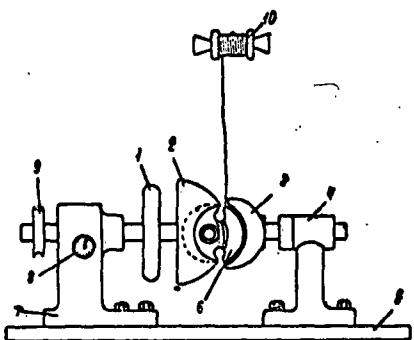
Schematic diagram of the winding machine with jaws. 1) Face plate; 2) fixed jaw; 3) movable jaw; 4) tailstock; 5) base of the machine; 6) stator pack; 7) headstock; 8) indicator; 9) driving pulley; 10) spool with wire.
